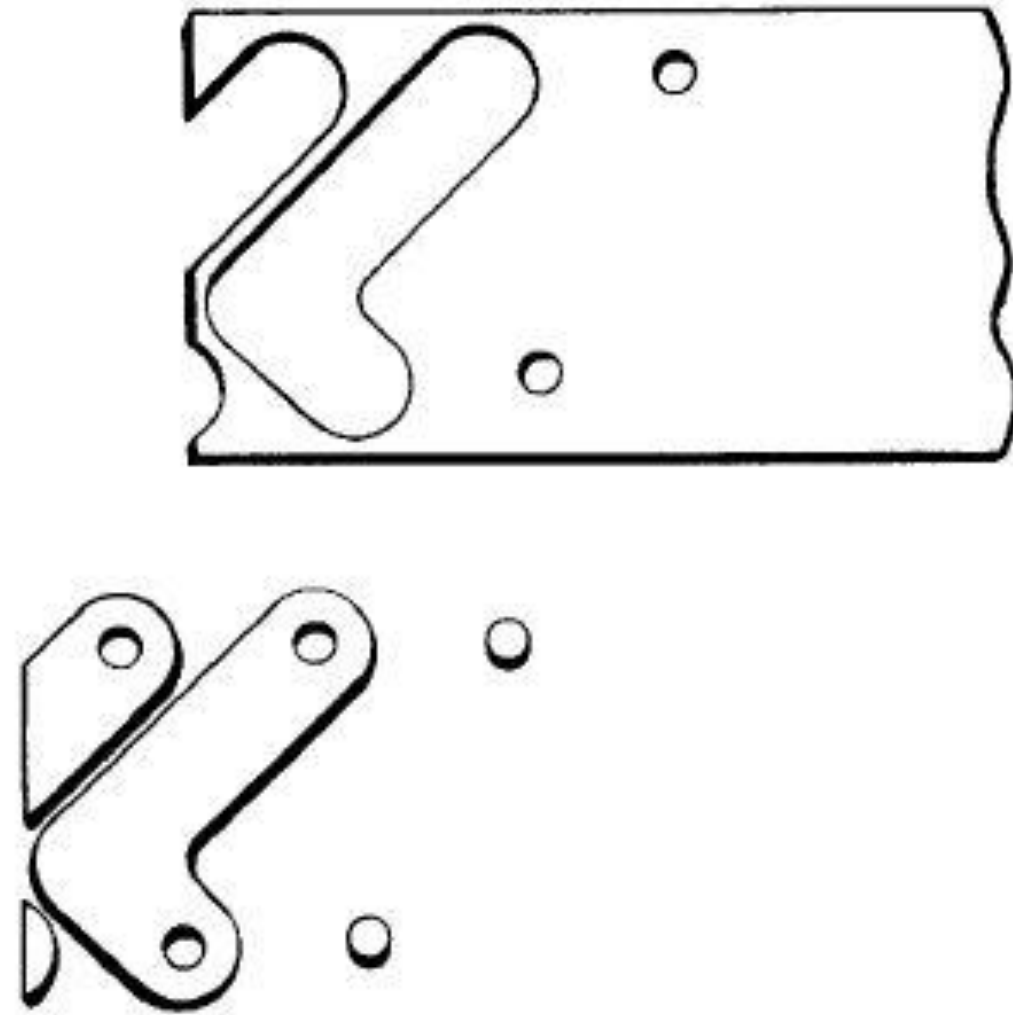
The resulting scrap strip and parts removed in testing the fourth layout.
